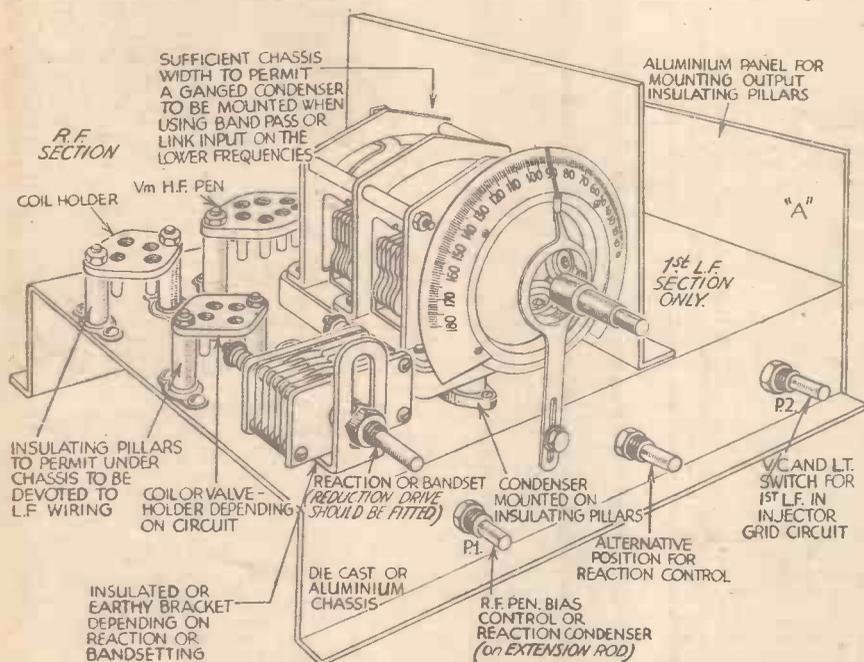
The suggested component layout for a combined R.F. and first L.F. chassis.
